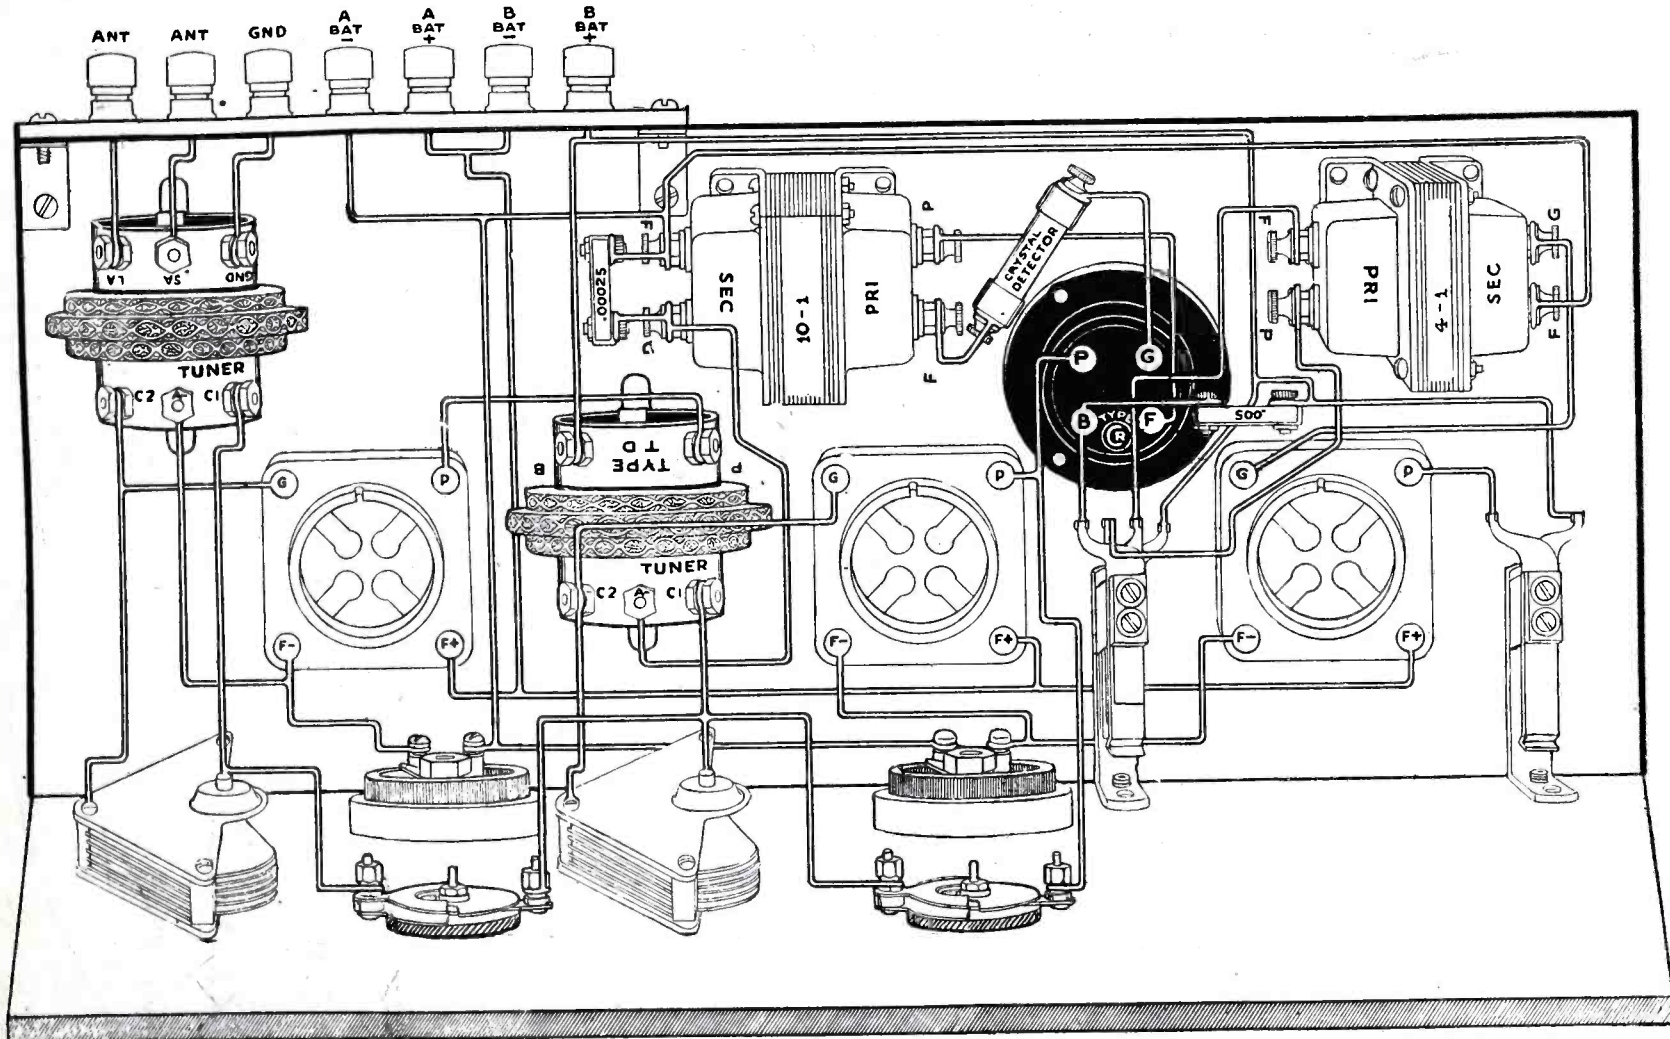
A combination panel and baseboard layout, showing the location and interconnections of all parts in the three-tube Rasla receiver.
